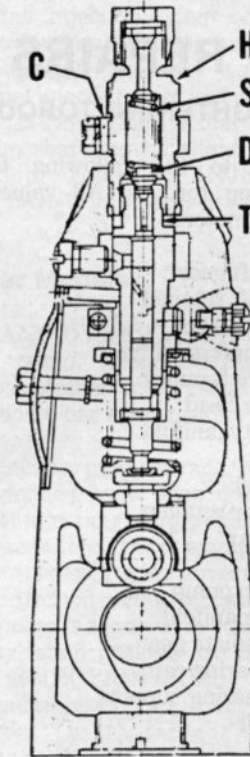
Cross-sectional view of Bosch PES fuel injection pump.
